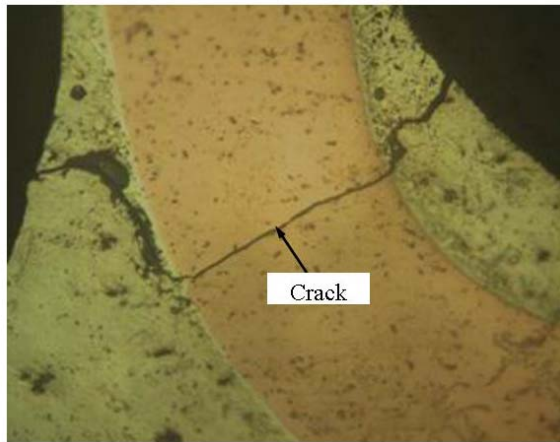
Crack in QFP gull wing solder joint and lead
